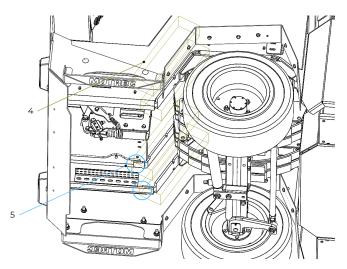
Ladder Frame Support UnionPlates and Weld Zones.
